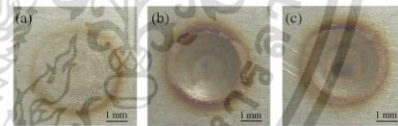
Appearances of the welded joints of SUS316 and SUS425 by all of UT R16 and LT different electrode shapes on SUS425 side (a) UT R16 - LT flat, (b) UT R16 - LT R16, (c) UT R16 - LT R30
